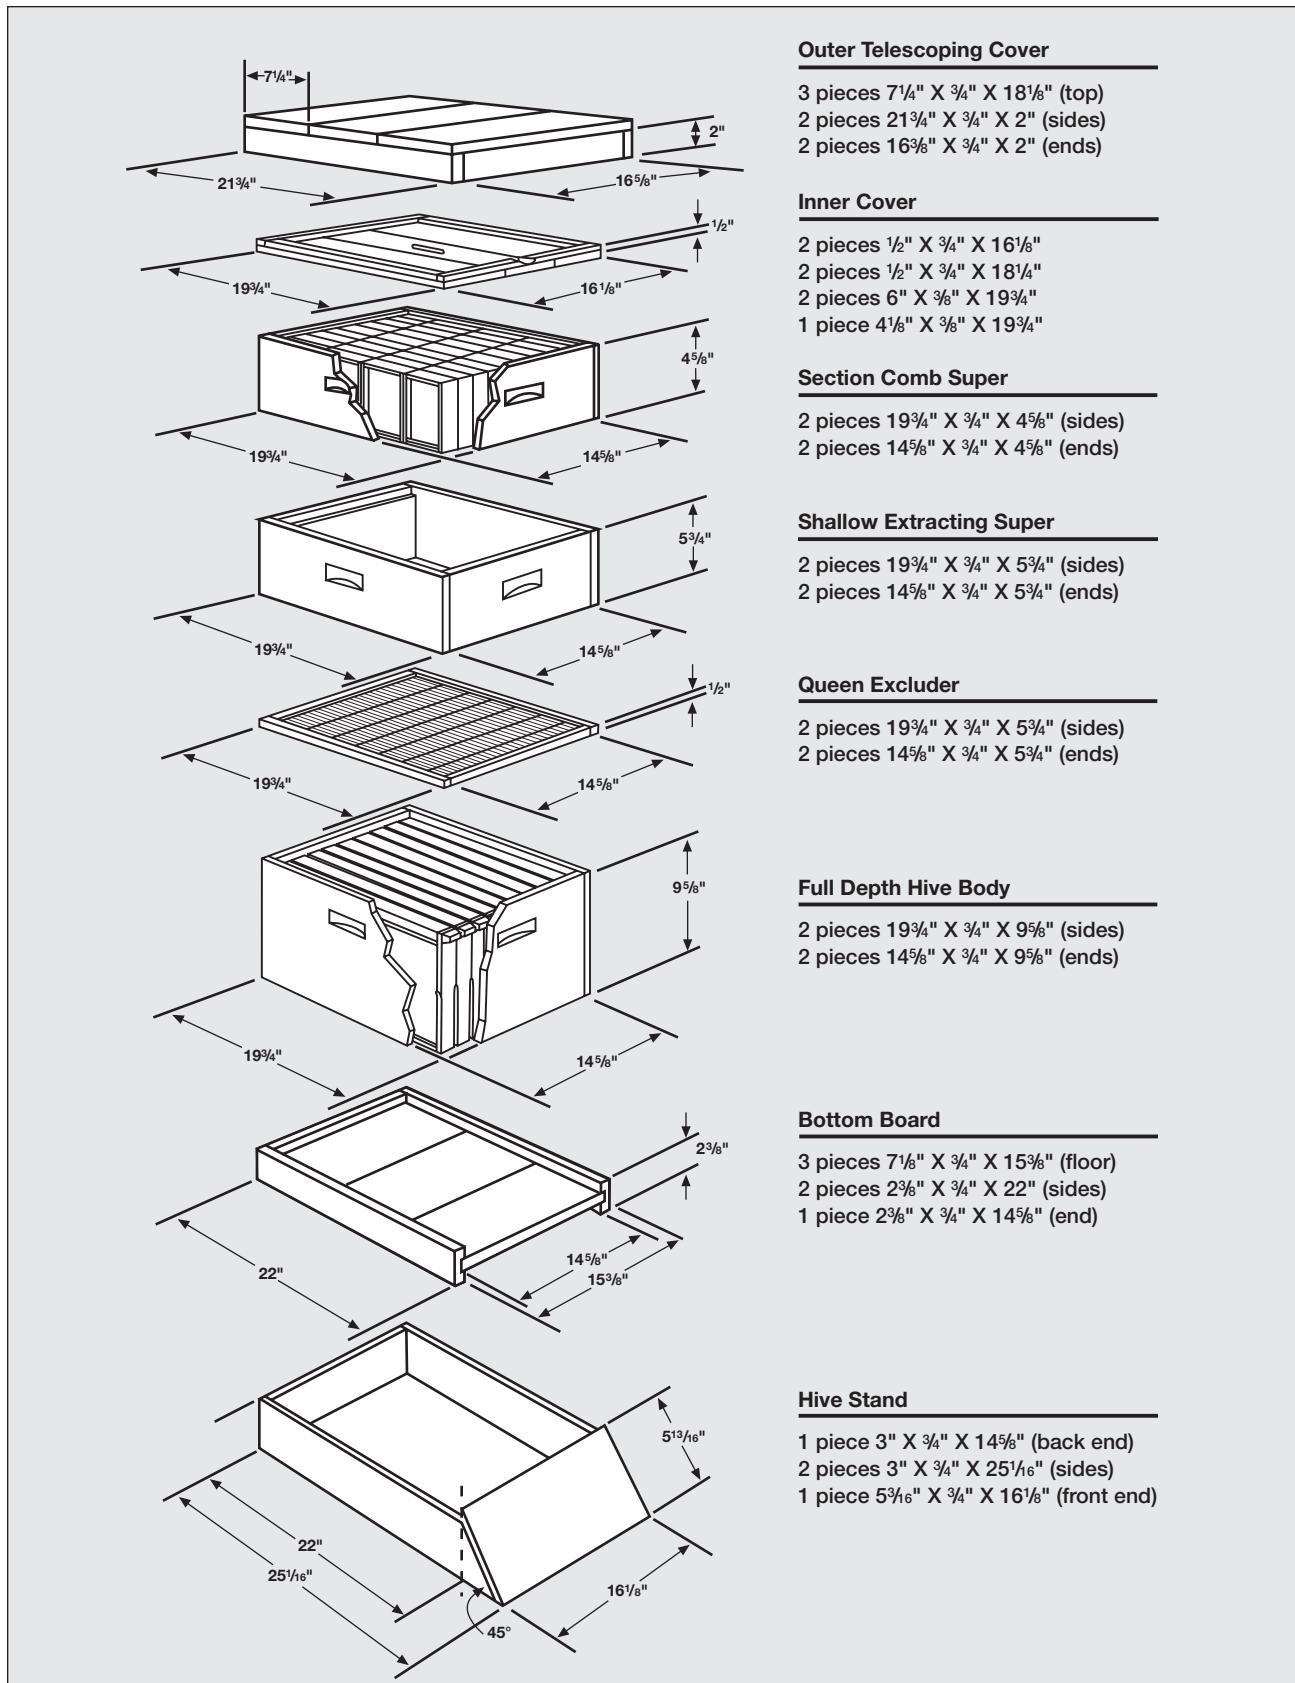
Equipment and dimensions for a standard Langstroth hive.
